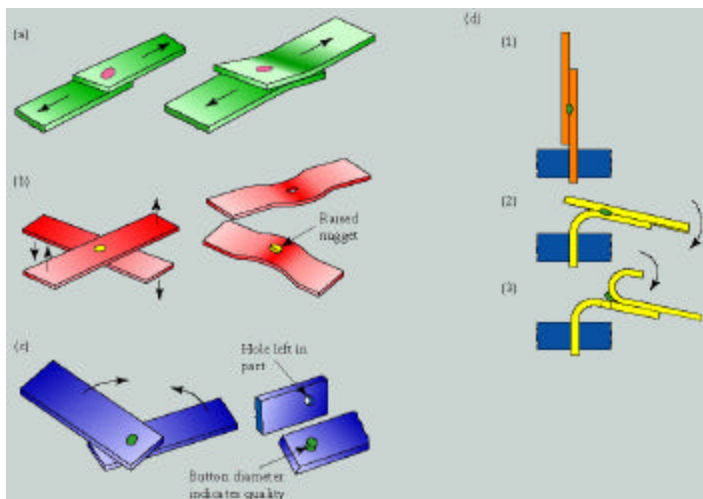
Tension-shear test for spot welds. (b) Cross-tension test. (c) Twist test. (d) Peel test.
